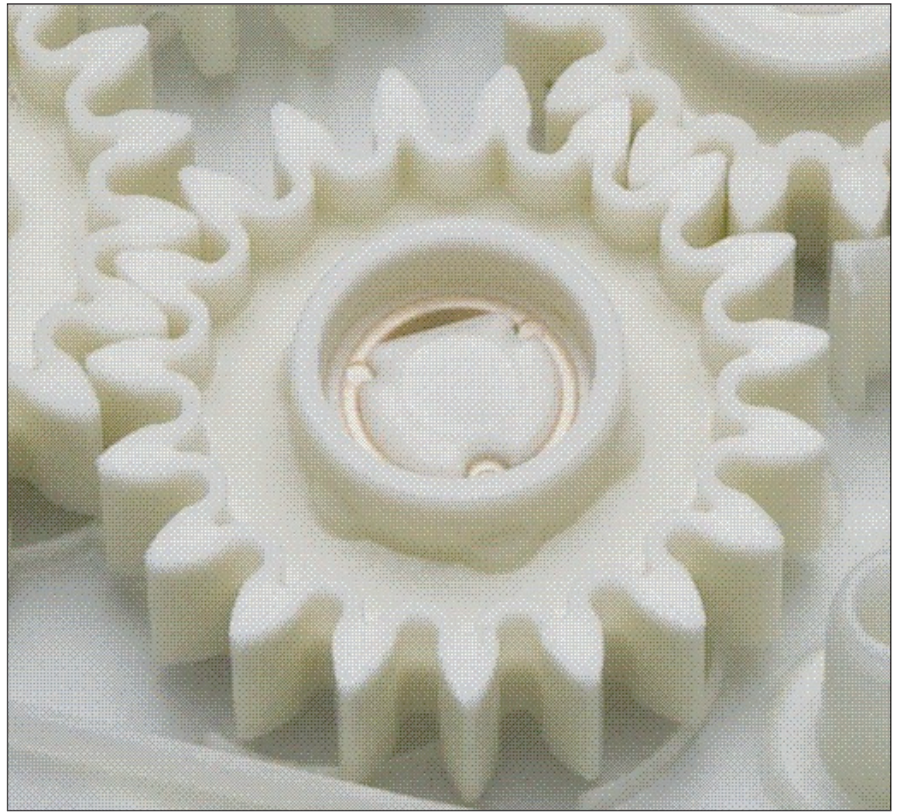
Coring out coarse pitch gears reduces processing time, weight and cost, and improves gear dimensional integrity.
